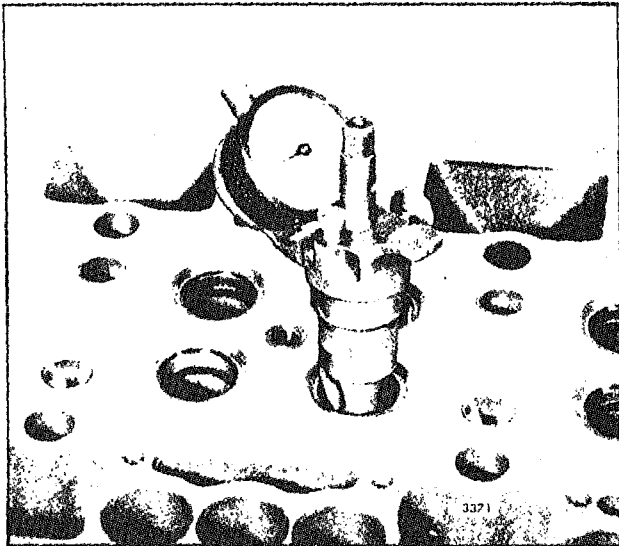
Checking Relative Concentricity of Valve Seat Insert with Relation to Valve Guide
